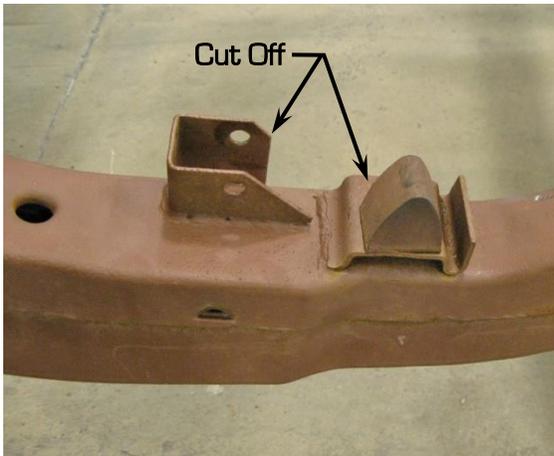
Remove Frame Bumper and Upper Shock Mount Brackets
